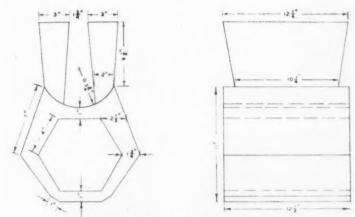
SKETCH OF HEXAGON, PADDED, SHOWING RISERS.
